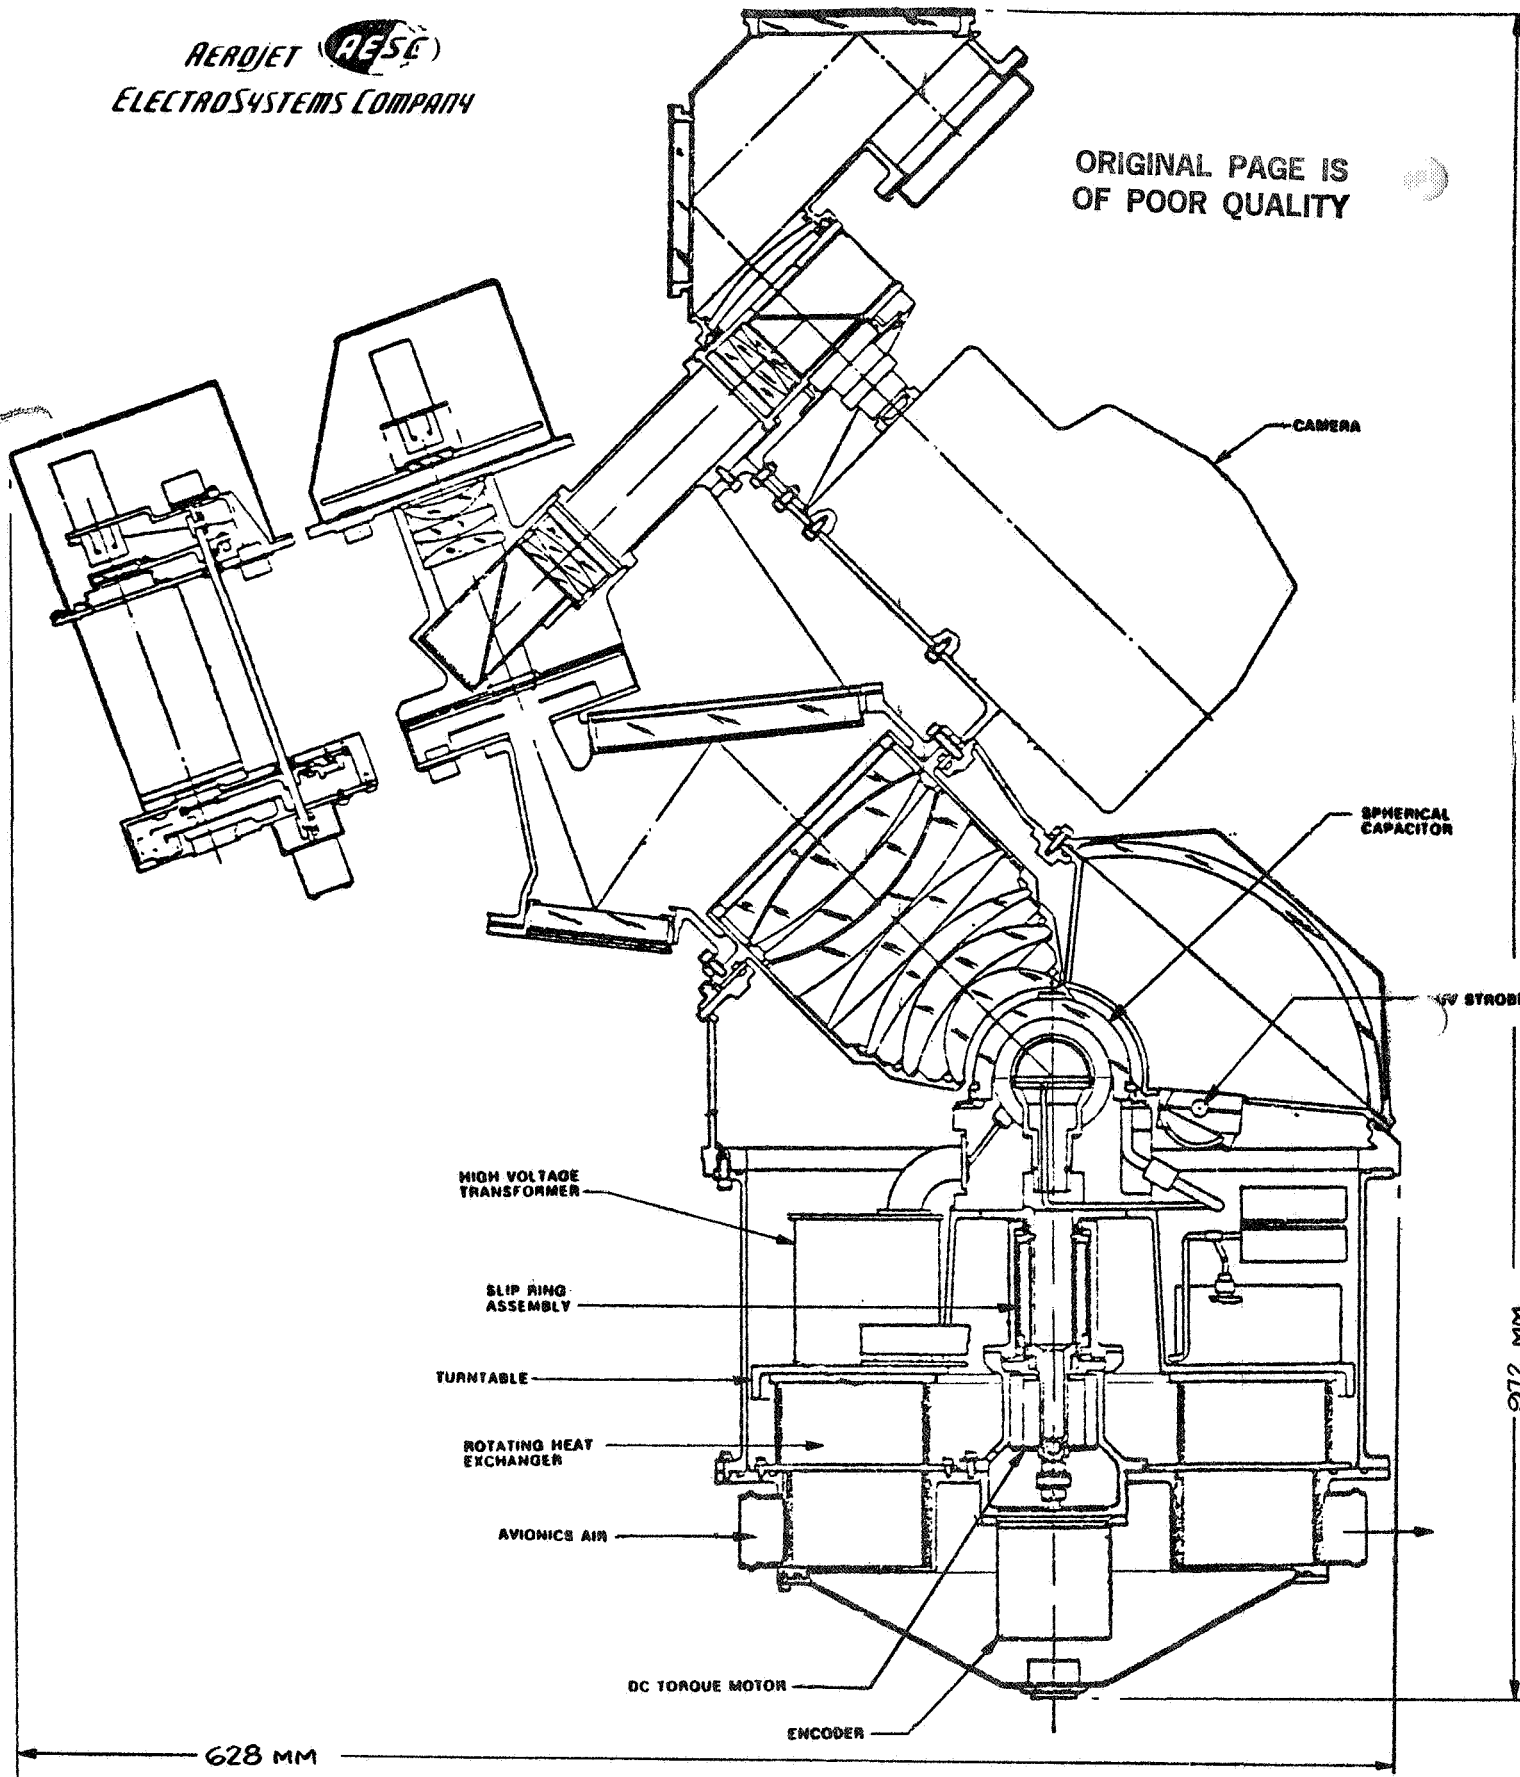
GFFC MECHANICAL ASSEMBLY (CROSS-SECTION VIEW)
